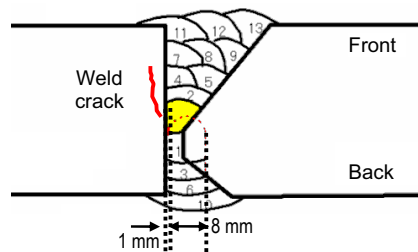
Order of welding layers and outline of back gouging in test welding for wide plate tensile tests.
